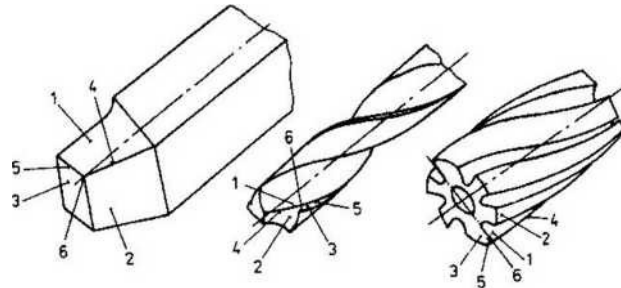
Important surfaces and edges of turning tool, spiral drill and mill [4]
